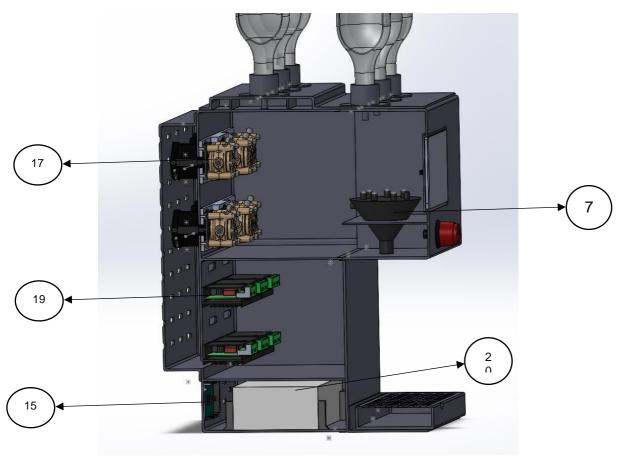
The section view for the complete assembly with major subcomponents.
